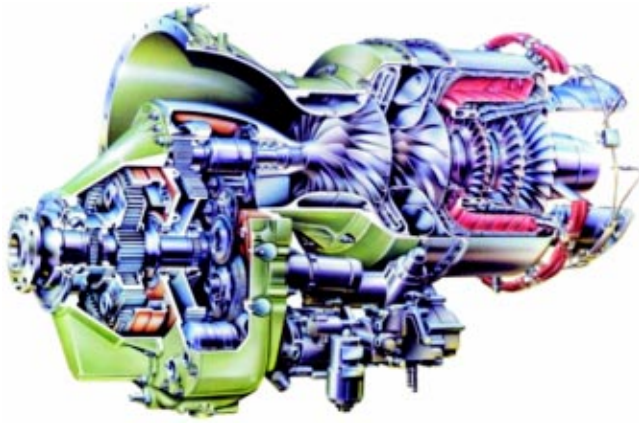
Honeywell shaft engine (formerly Garrett Engine Division, TPE331-12U)
